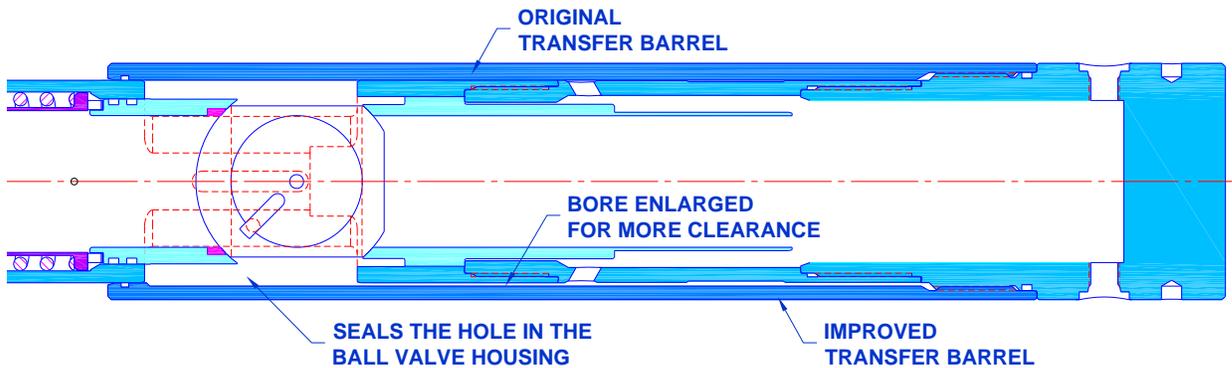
Improved Transfer Barrel for easier assembly and disassembly.
